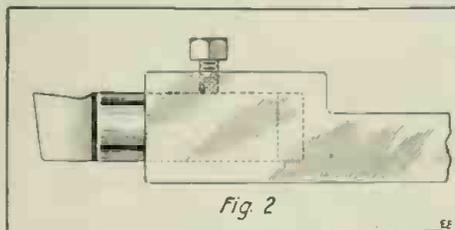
Universal Tool Holder Which Is Seen in This Case Supporting a Tool for Cutting "Square Threads." The Tool Point Somewhat Resembles the Familiar "Parting Tool."
